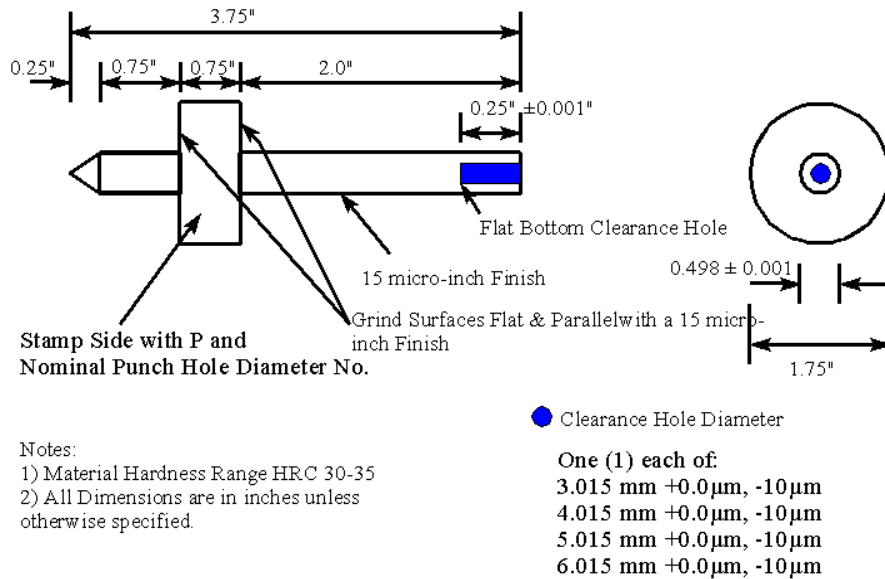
Schematic showing the general dimensional design requirements of the punch plungers fabricated for the shear punch test fixture.
